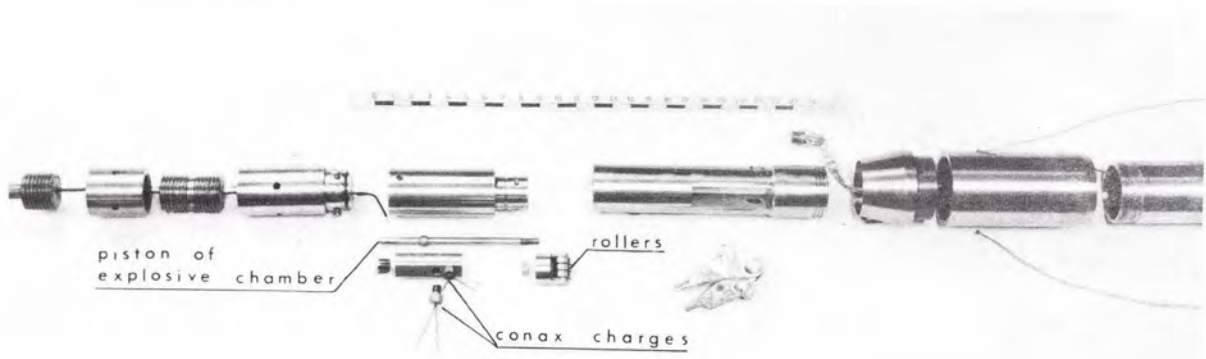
Exploded View of Piston Assembly with Explosive Chamber Disassembled
